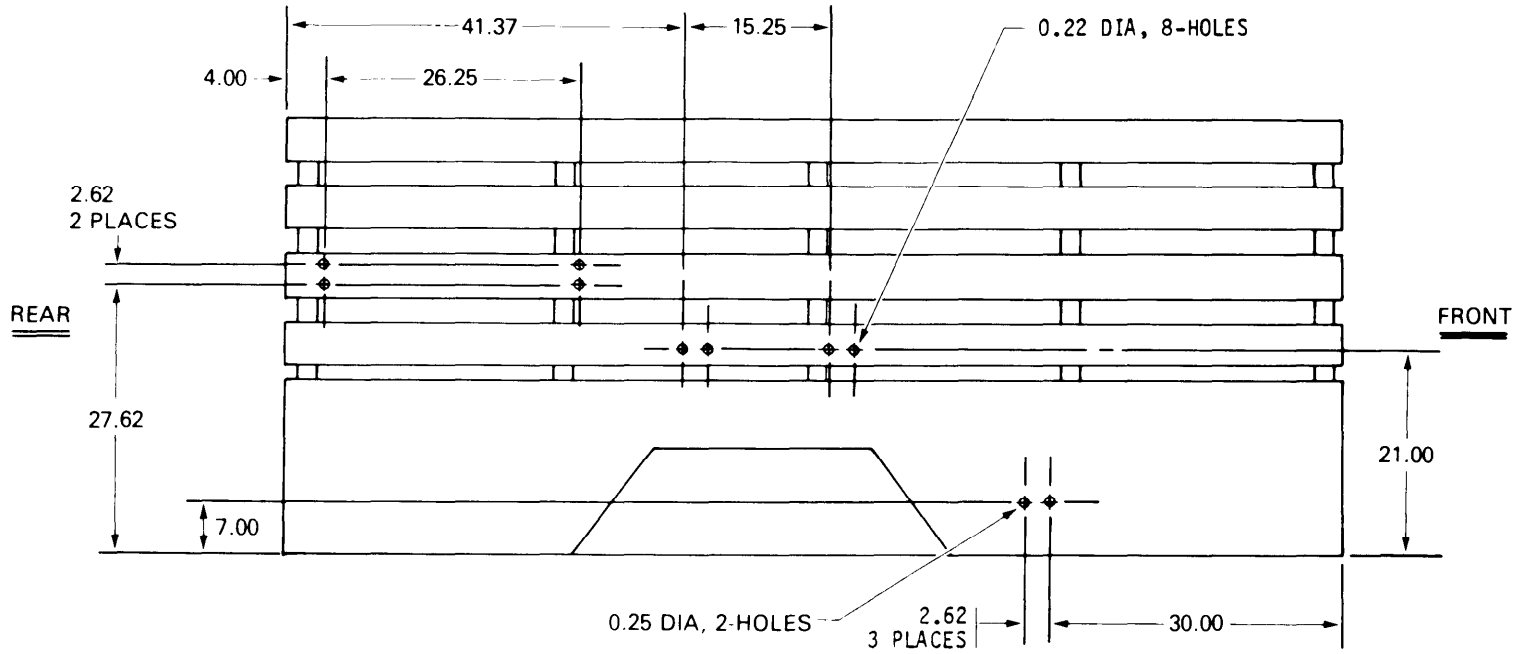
Hole Dimensions for Blind Rivet Nuts and Strap Loops, Unit 2, M105A2, Left Side Elevation.
